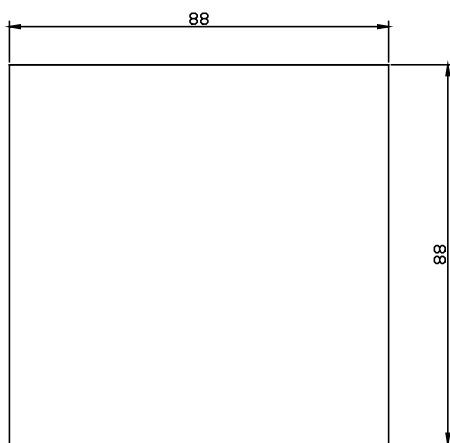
ALP220-EF Installation Opening Dimensions (Unit: Mm)
